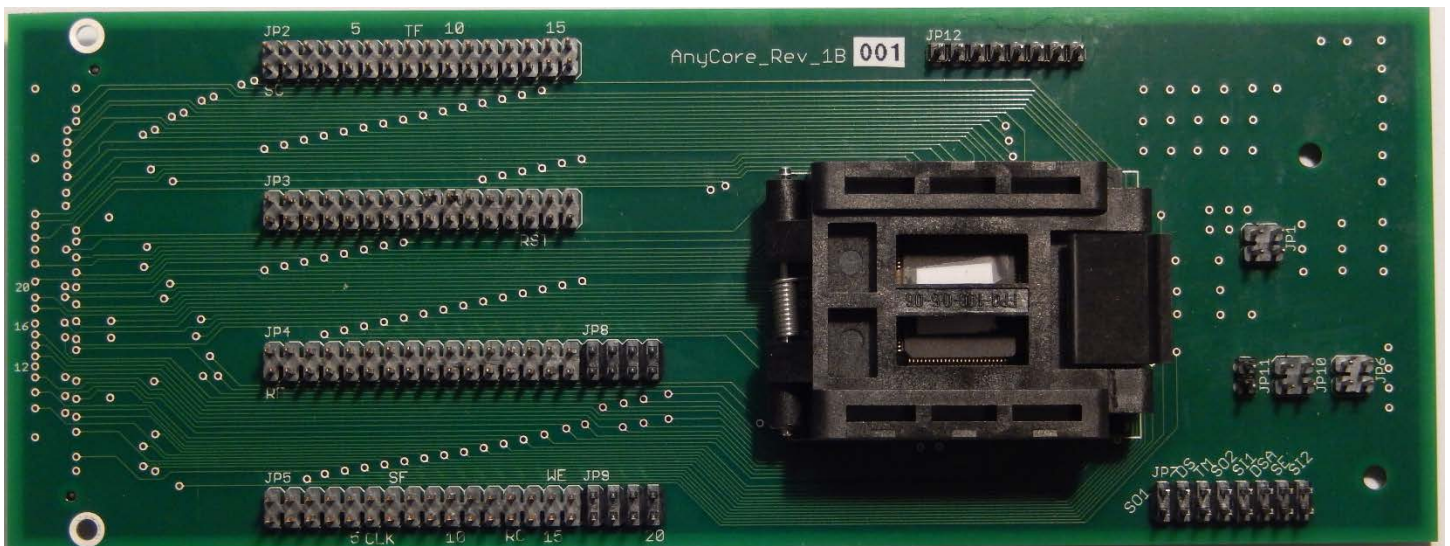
AnyCore package inserted into socket which is assembled on a 4-layer PCB. Underside of PCB has the FMC LPC connector for attaching the PCB as a mezzanine card to the Xilinx ML605 FPGA board. The narrow board width is the same as the LPC connector, so it can be attached to arbitrary Xilinx boards (such as Zynq boards).
